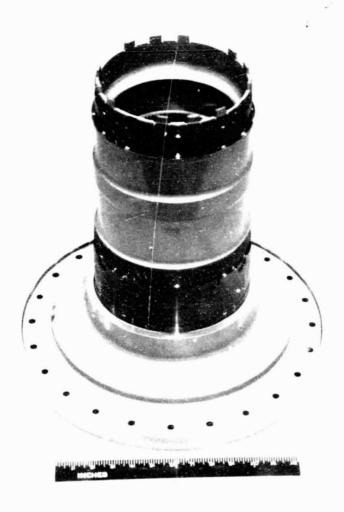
High-Pressure Turbine Front Bearing Stub Shaft
